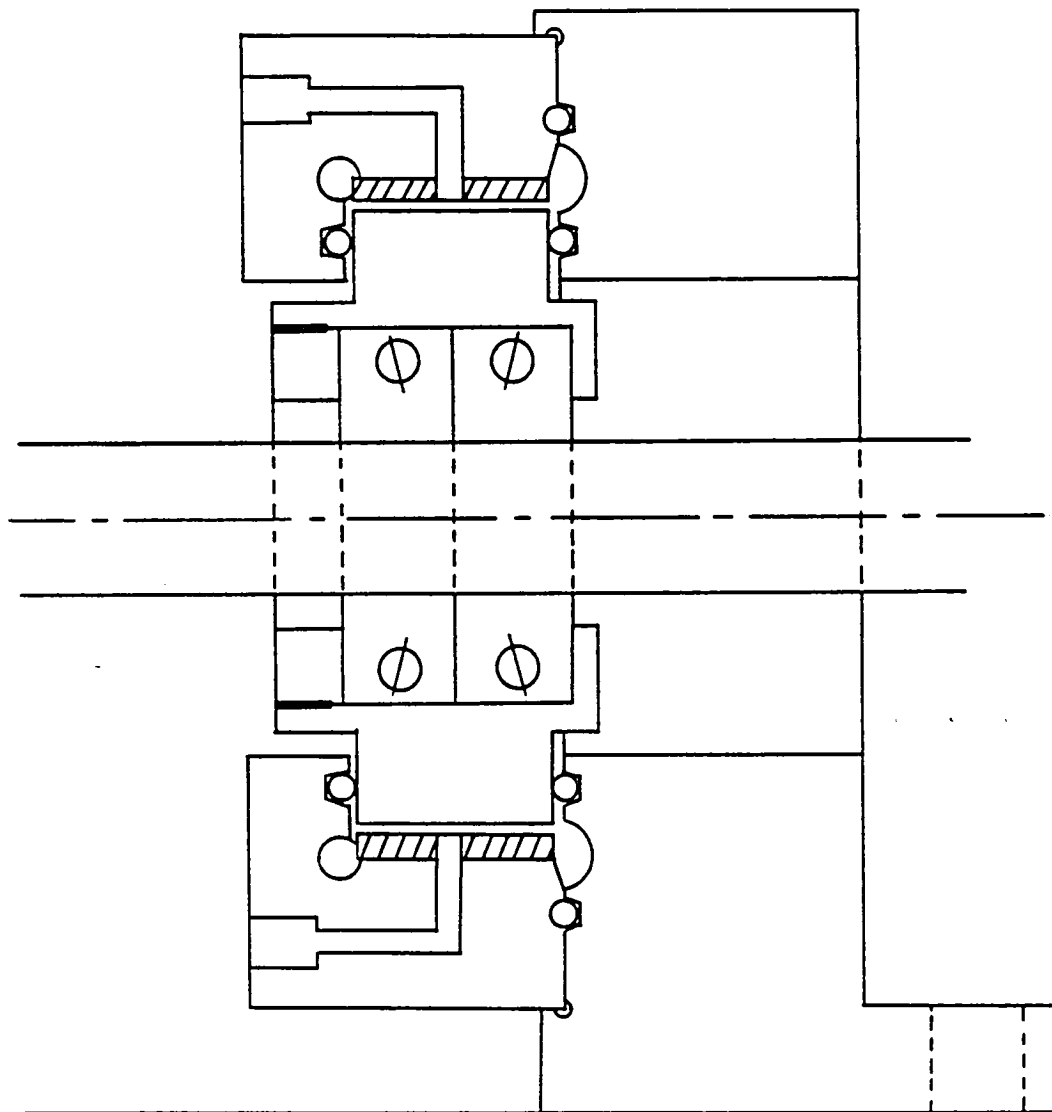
Schematic Side View of Experimental Damper Bearing Configuration
